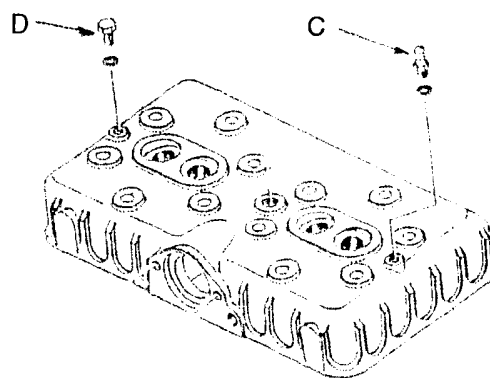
532 & 582 engines, position of cylinder head outlet nipple.
